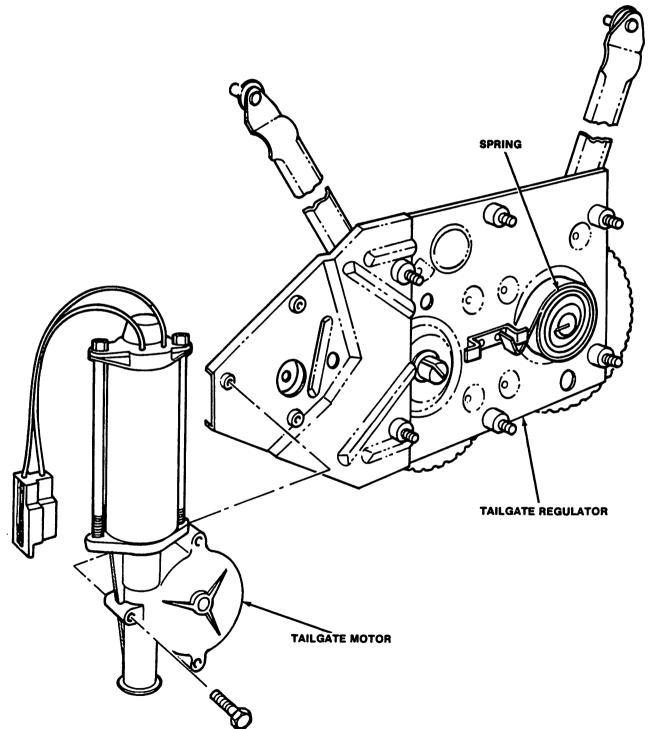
H-5 Power Tailgate Window Regulator and Motor
